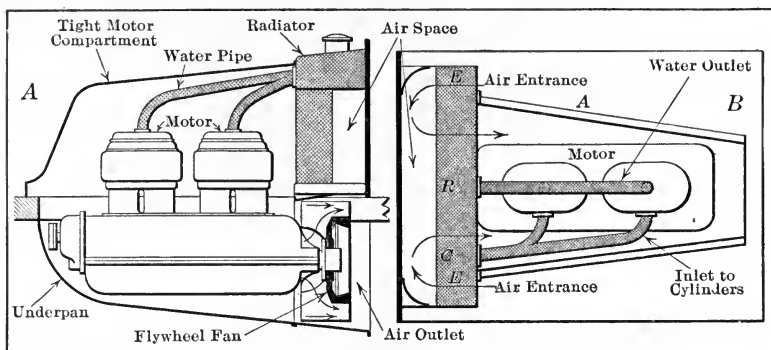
Renault Thermosyphon System, in which Radiator is Placed in Back of Engine Instead of in Front, as is Conventional Practice. A—Showing Method of Utilizing Fan Fly Wheel to Insure Air Circulation Through Radiator. B—Plan View Depicting Flow of Air Currents Through Cooler.
